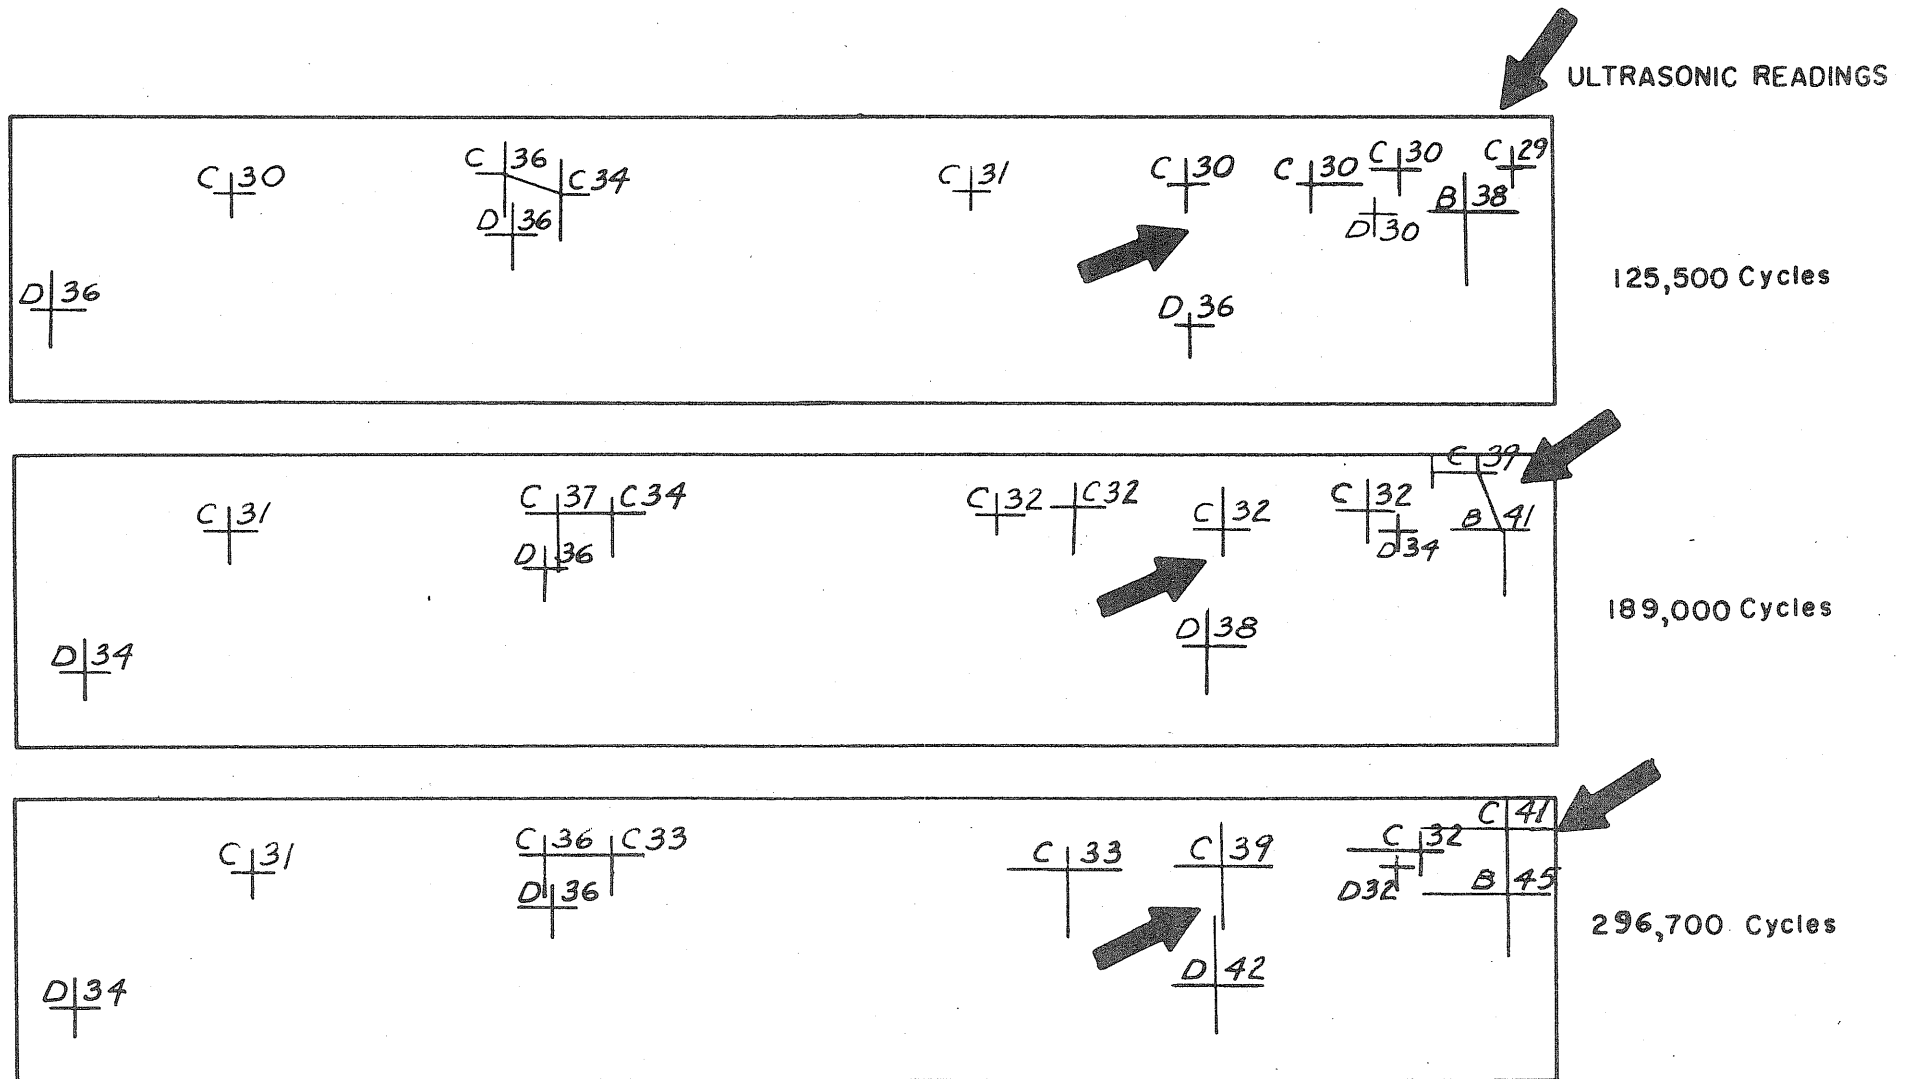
(CONT.) SKETCH OF FRACTURE SURFACE AND ULTRASONIC READINGS FOR FLAWS IN WELD OF SPECIMEN HY-35.
